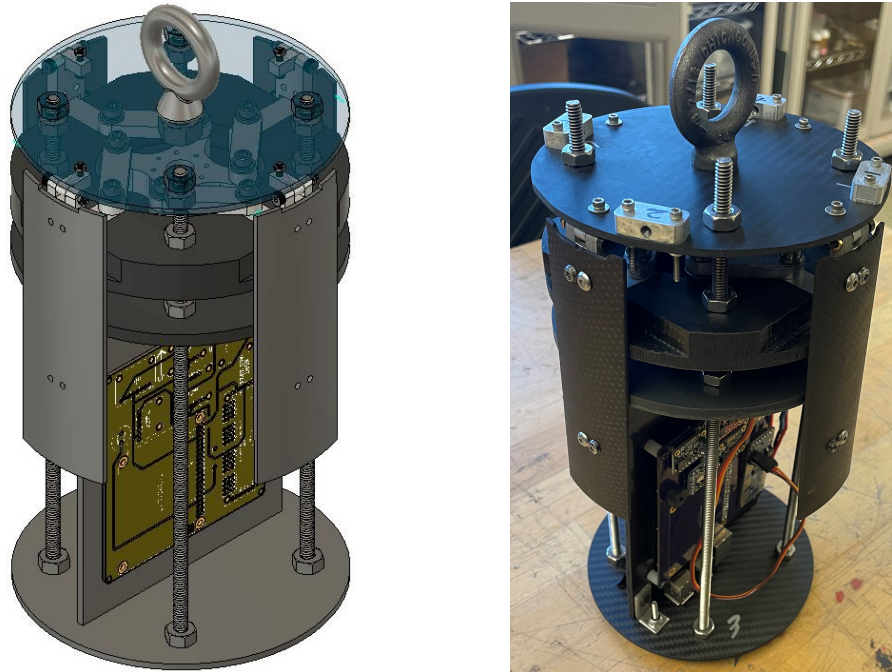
CAD model (left) and as constructed (right) Integrated ACS
